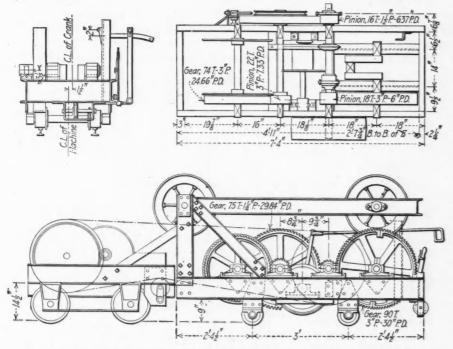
DETAILS OF THE REMODELED CHURN DRILLING MACHINE
